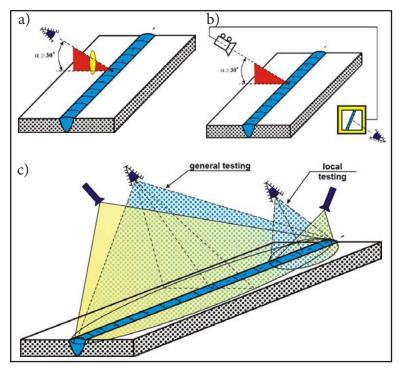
Visual tests of welded joints: a) direct, b) remote,
